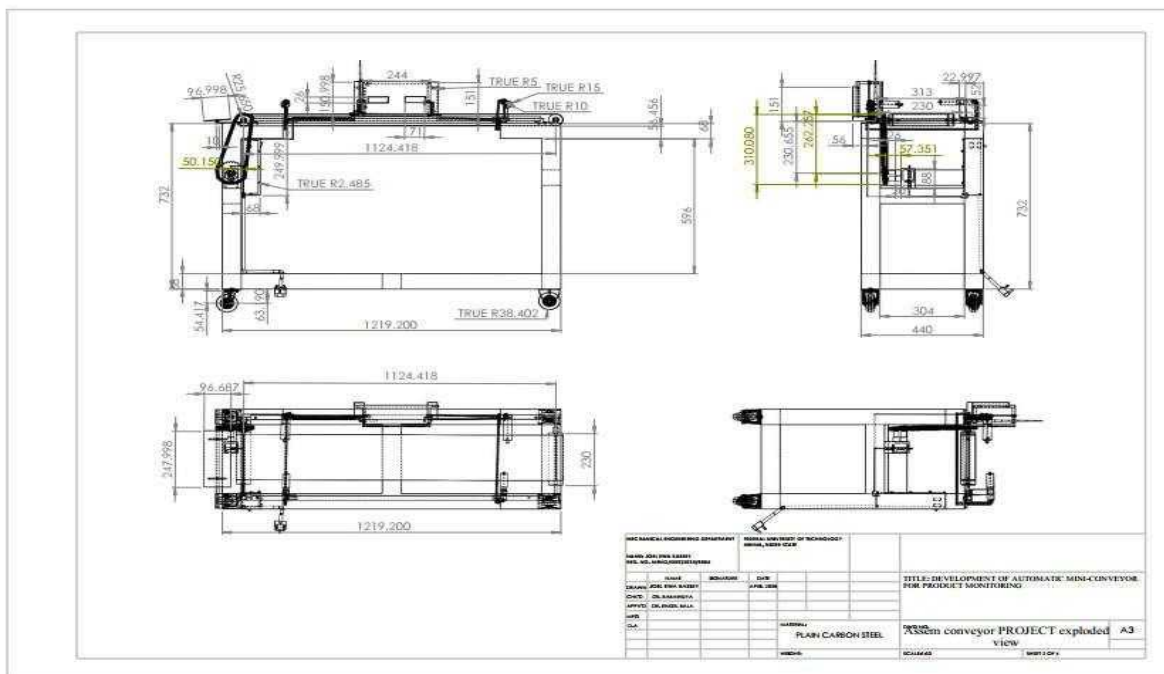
2D Solid work design of mini-automatic conveyor after design calculations and before fabrication
